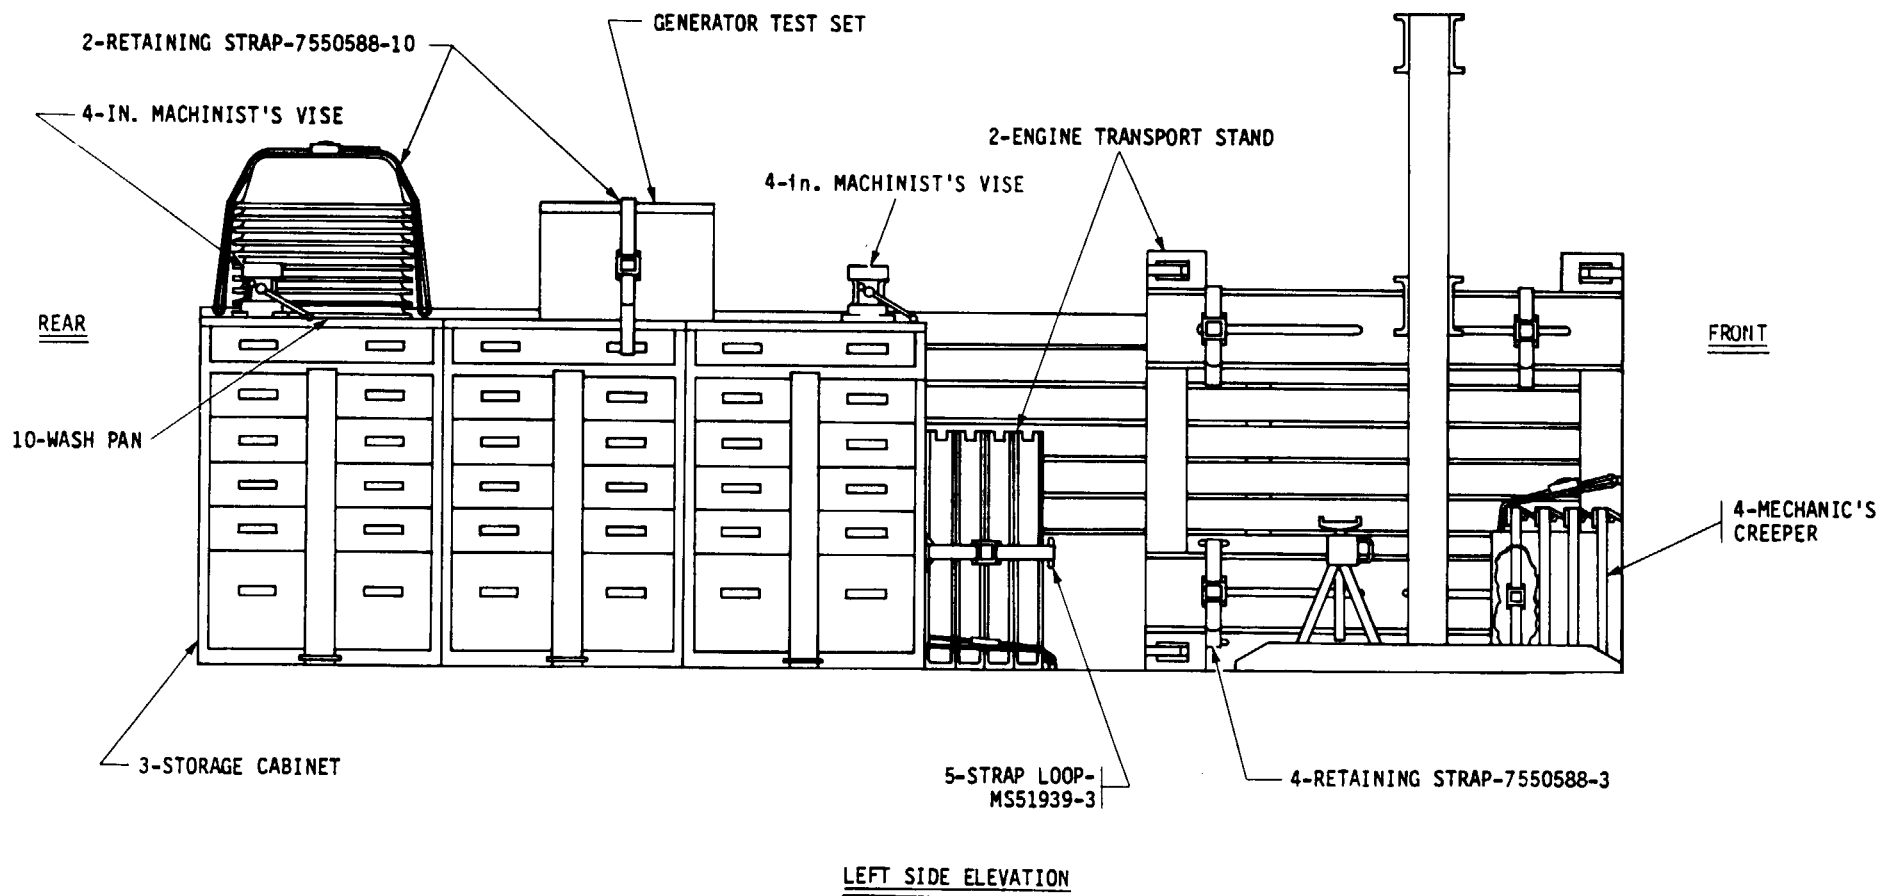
Components to be Mounted, Unit 2, M35A2, Left Side Elevation.
